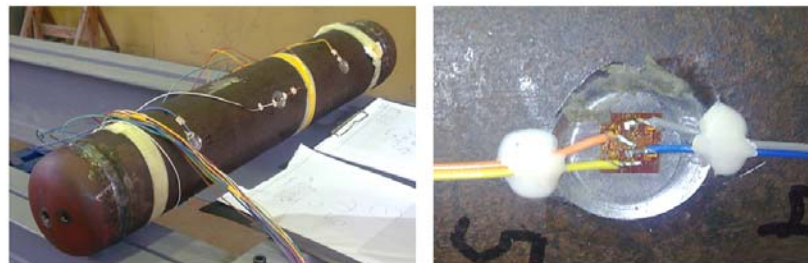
Pipe prepared for pressure testing with strain gauges attached at the machined defects.
